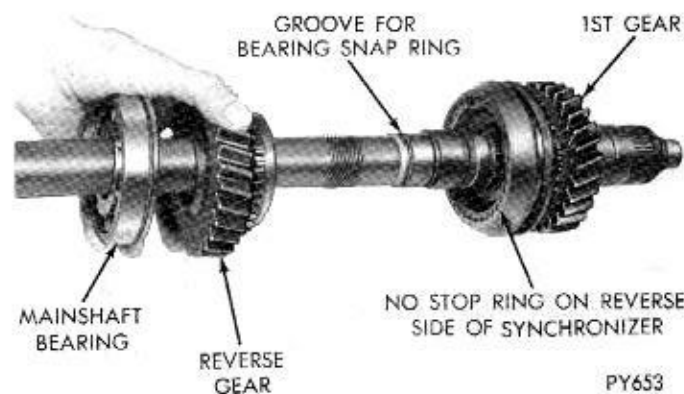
Reverse Gear and Mainshaft Bearing—Removal or Installation
